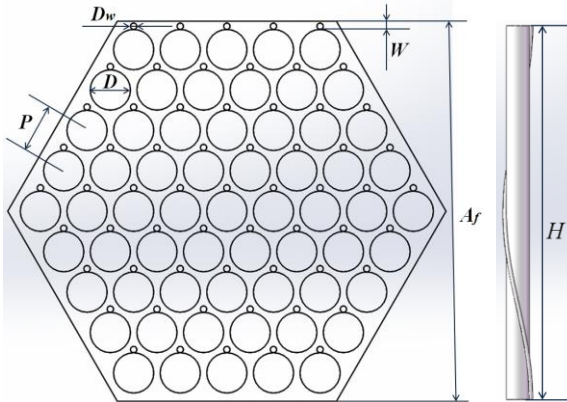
Geometry configuration of 61-pin wire-wrapped fuel assembly.
